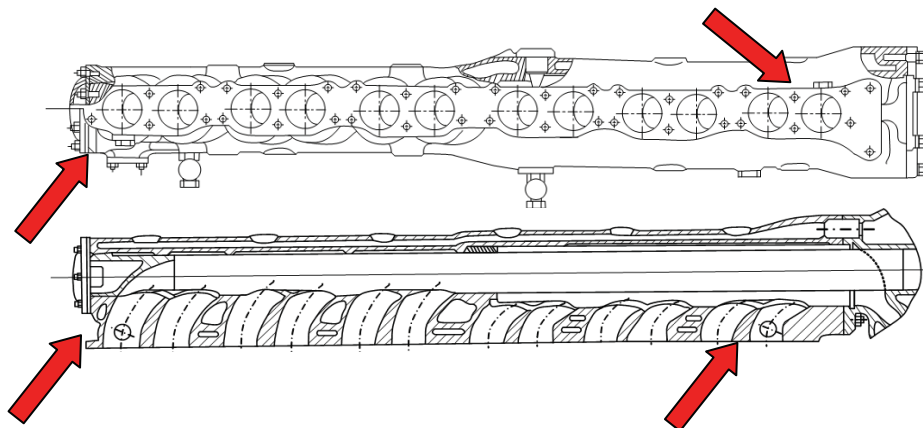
Exhaust channel of M401 engine with marked places of mounting the pressure transducers
